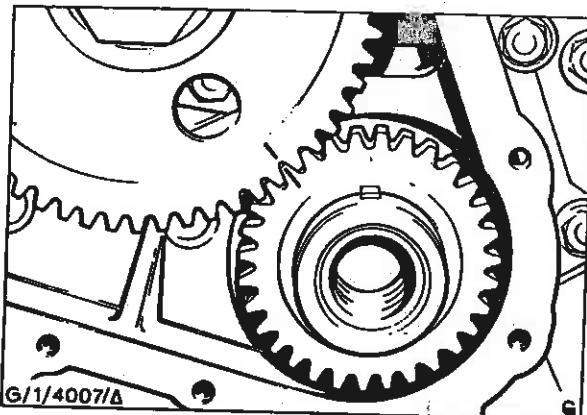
Camshaft and Crankshaft Gear Timing Marks in Alignment
